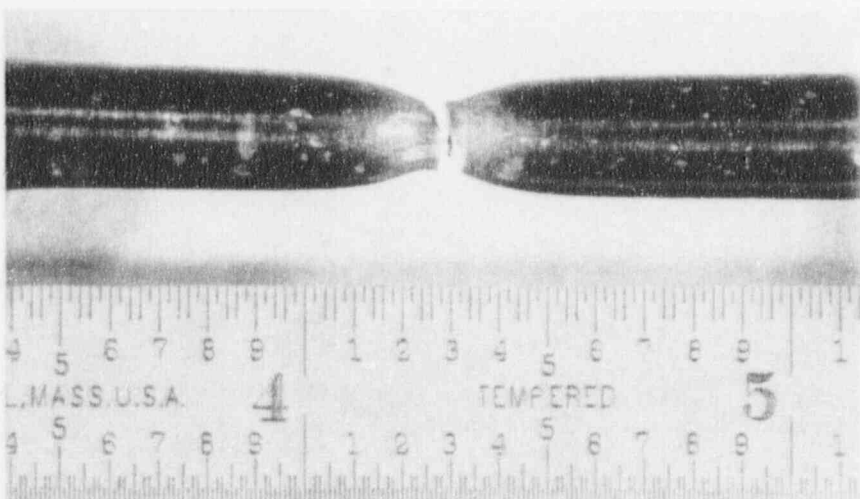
Fracture Location, Necking Behavior and Fracture Appearance for Irradiated Base Metal Tensile Specimens.
